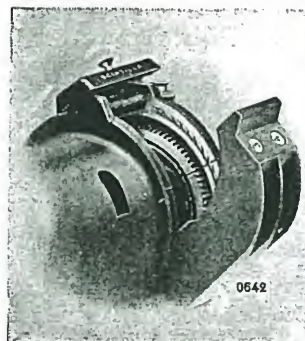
E. MARKS ON FRONT END PLATE AND LARGE DISTRIBUTOR WHEEL
